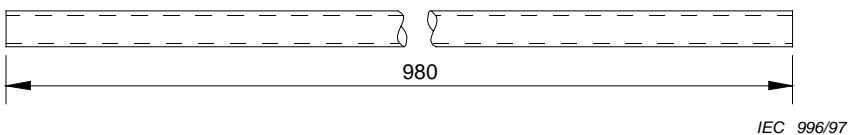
Impact test fixture – Pendulum shaft end
